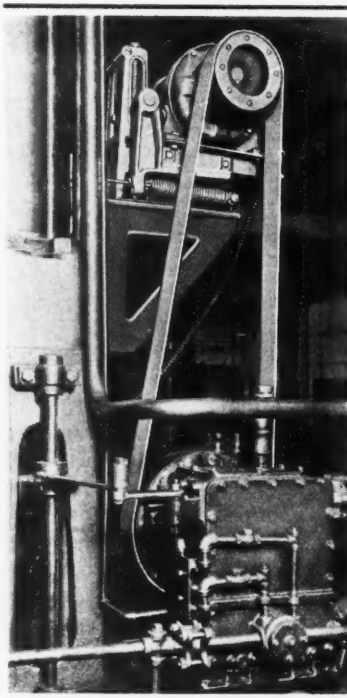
Vertical Drive Base that Permits Quick Changing of Belt Tension
